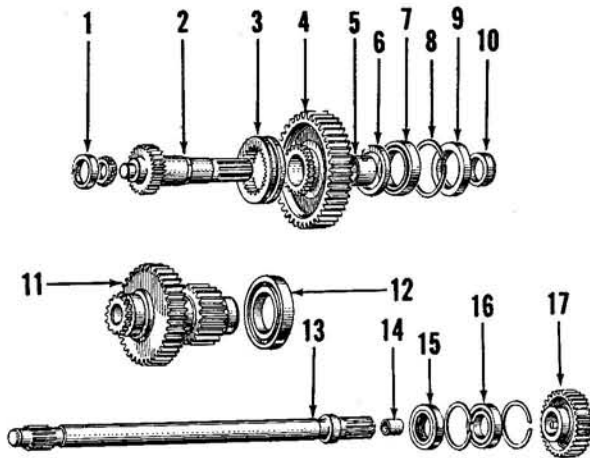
Exploded view of secondary transmission and pto counter shaft assembly.
